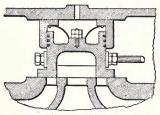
Slide-valve relief-frame on back of slide-valve.
